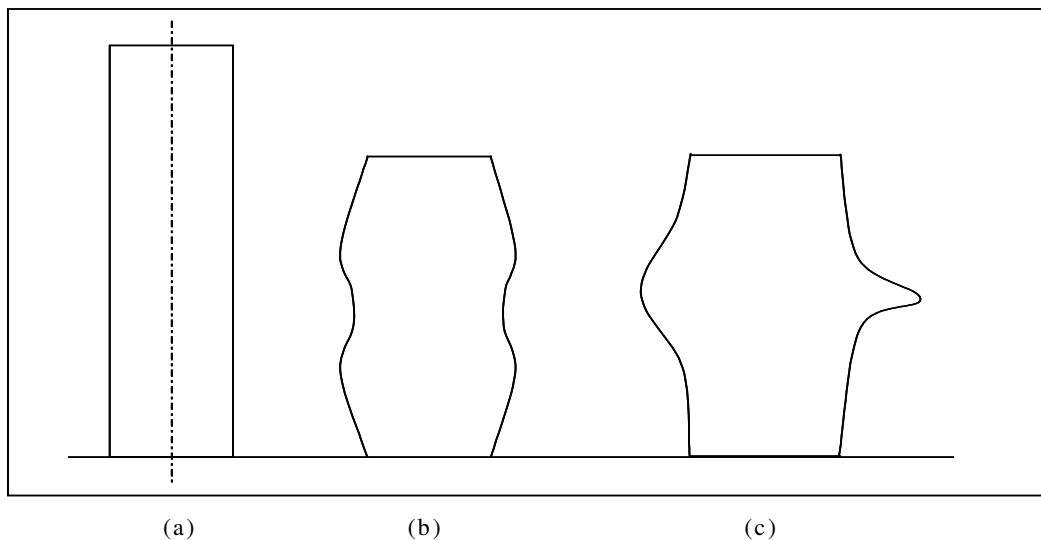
(a) Initial Shape of the Specimen (b) Final Shape Obtained for Inadequate Heating (c) Final Shape Obtained for Proper Heating.
